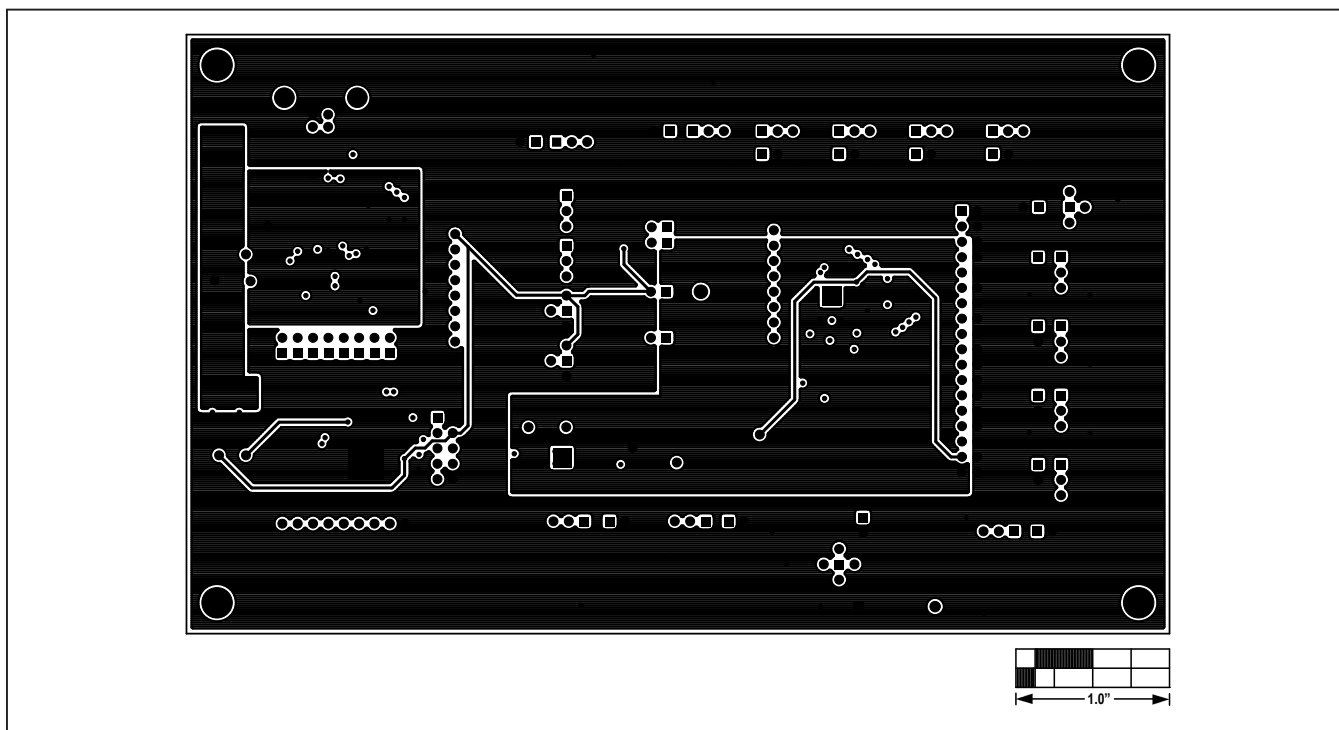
MAX5110 EV Kit PCB Layout—Power Layer 3
